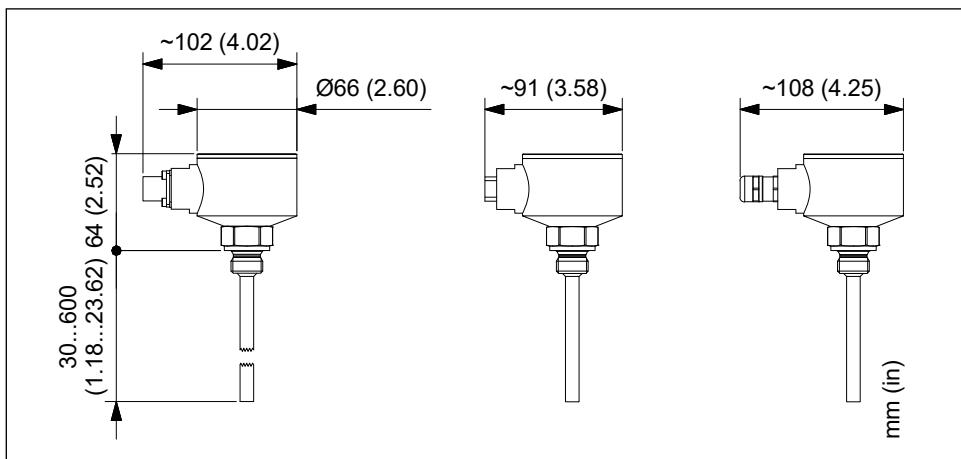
Installation dimensions TEM-EX-L2* (housing type S)
